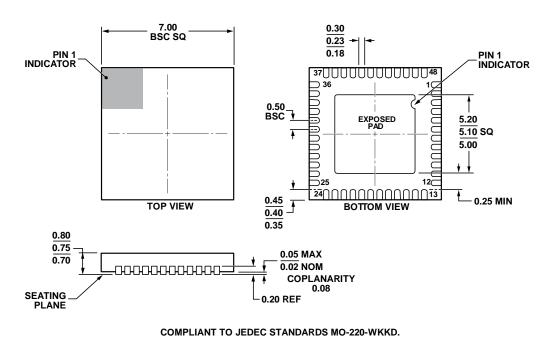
48-Lead Frame Chip Scale Package [LFCSP]
